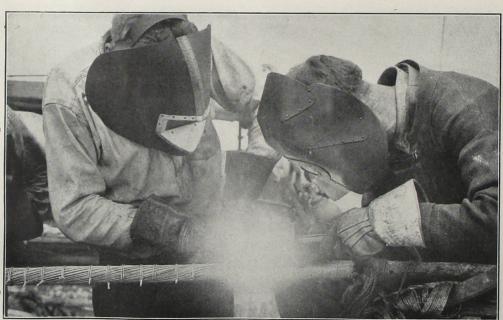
NOT MEN FROM MARS BUT TECHNICAL EMPLOYEES WELDING THE CABLE ARMOR WIRE
